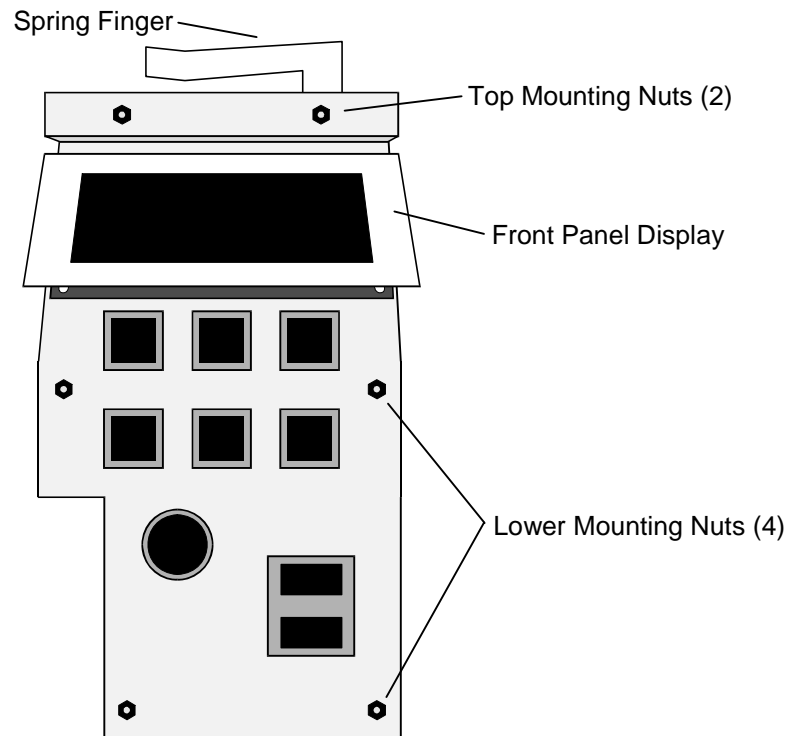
The Switch Bracket Assembly (Front Panel)
